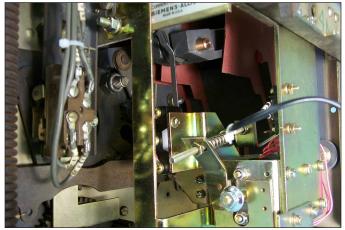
Correct Positioning of the DTA Assembly Front Mounting Bracket and Auxiliary Switch Arm.
